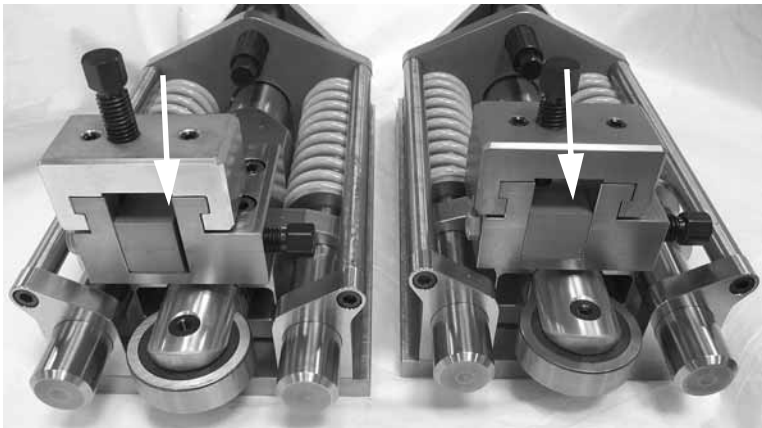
Insert the spacer into the tool block in the required orientation, with the threaded hole aligned with the screw hole.
